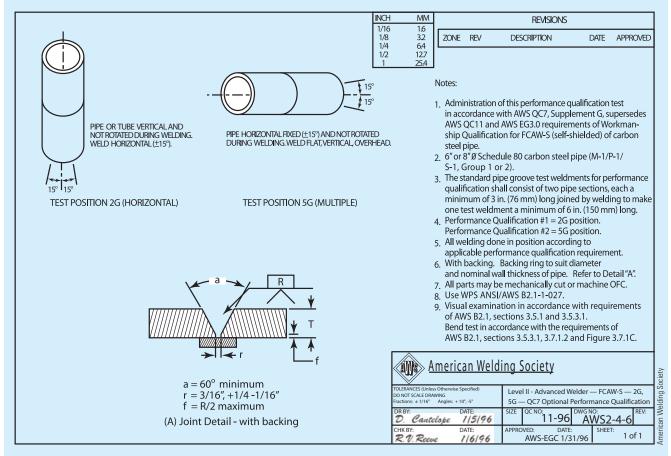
Practices 15-11 and 15-12 AWS SENSE Flux Cored Arc Welding FCAW-G and FCAW-S Workmanship sample for steel pipe.
